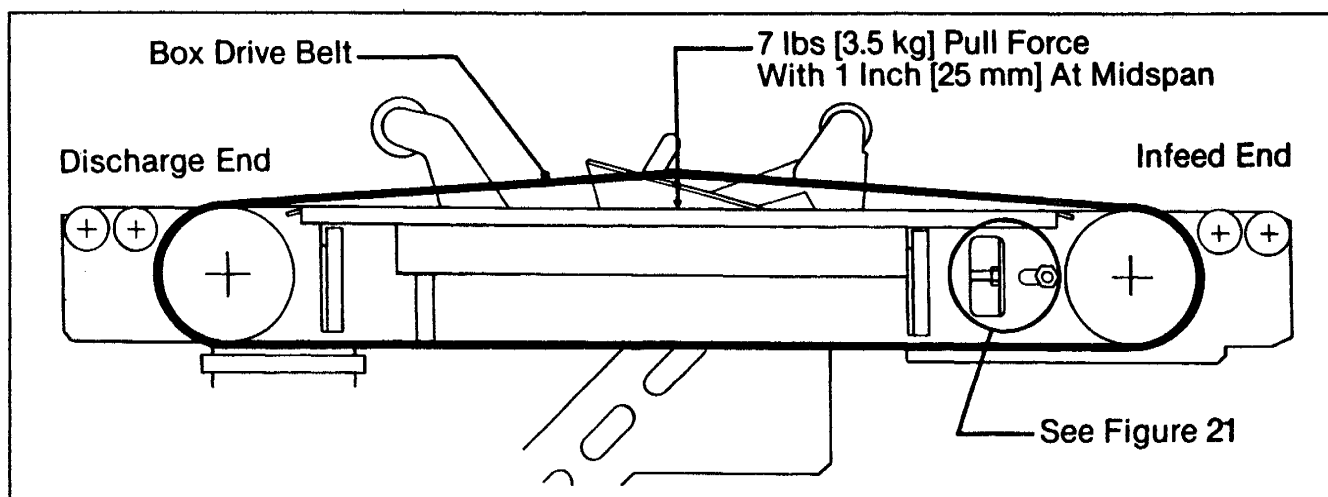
Box Drive Belt Tension Adjustment - Left Side View
